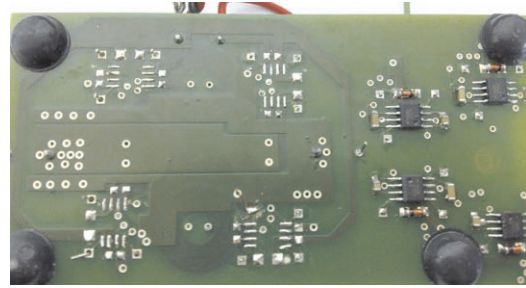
Picture for core-less prototype. Output power for this converter is 60W and a very low profile is achieved (4 mm)
